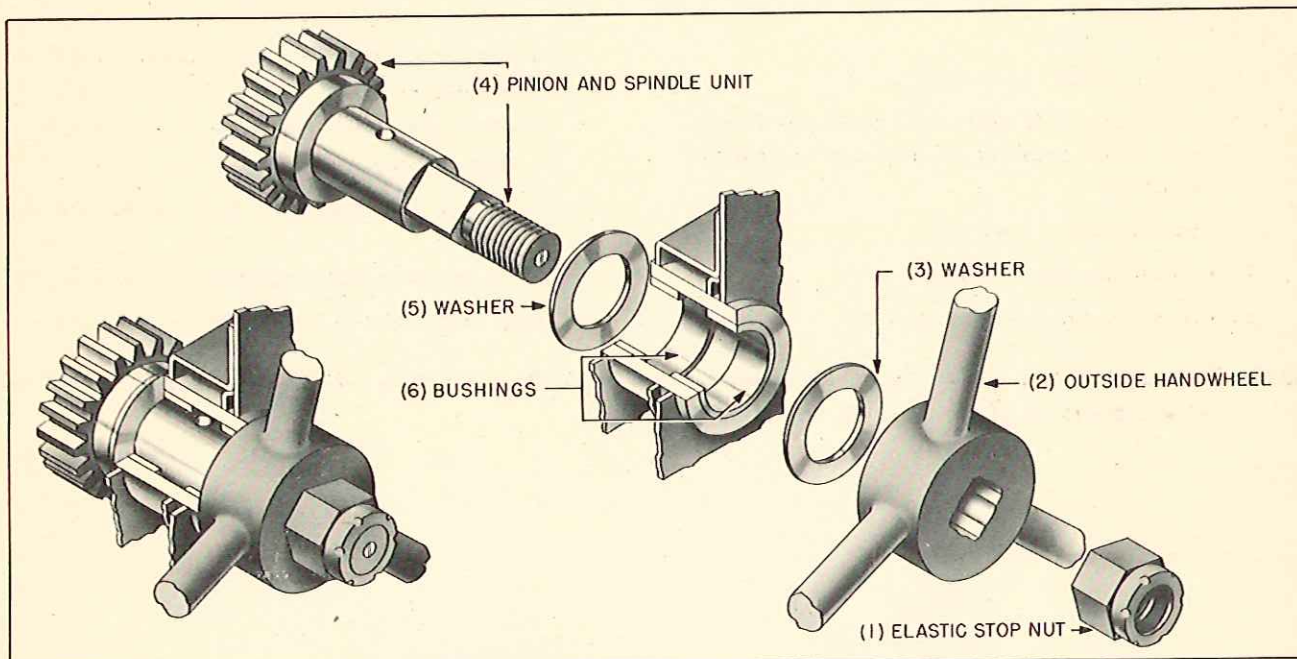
Pinion (outside handwheel), assembly and exploded views, TLD-2(crs) door.
